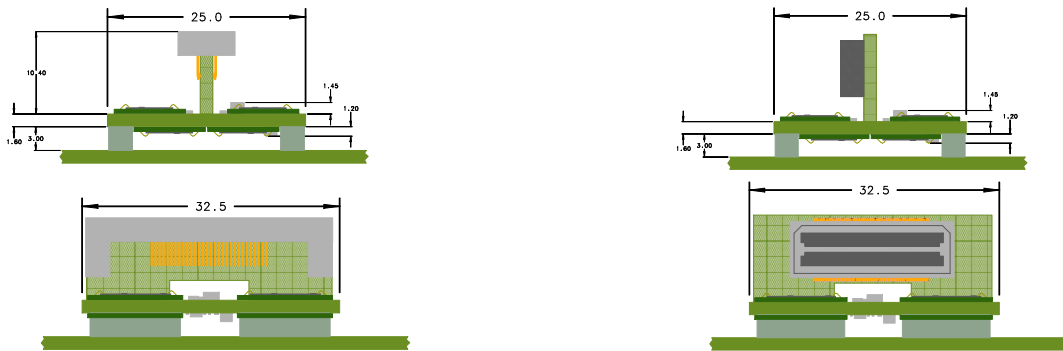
Side views of the MCM-board showing two versions of the Samtec connector mounted on a vertical board glued to the top surface of the MCM-board. To the left a connector for edge mounting is used and to the right a connector for surface mounting.
